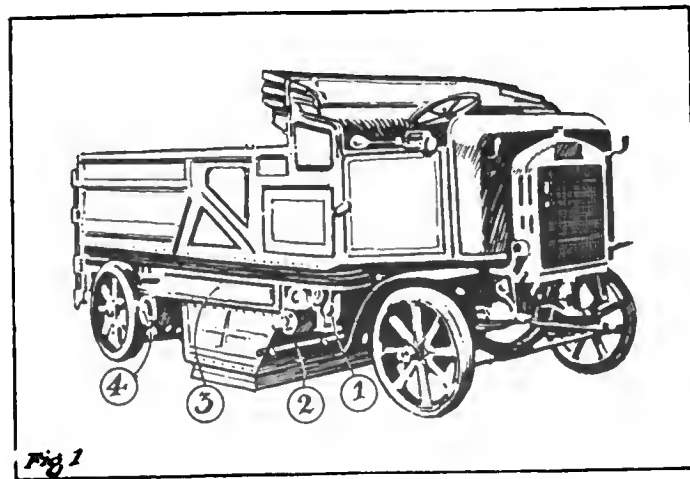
Three-quarter right front view of Hill's Vacuum Road Cleanser. 1—Three-speed and reverse gearbox for transversely mounted motor under driver's seat. 2—Pipes for spraying water in front of brush. 3—Casing for main driving shaft. 4—Worm and worm-wheel with jackshaft and differential
